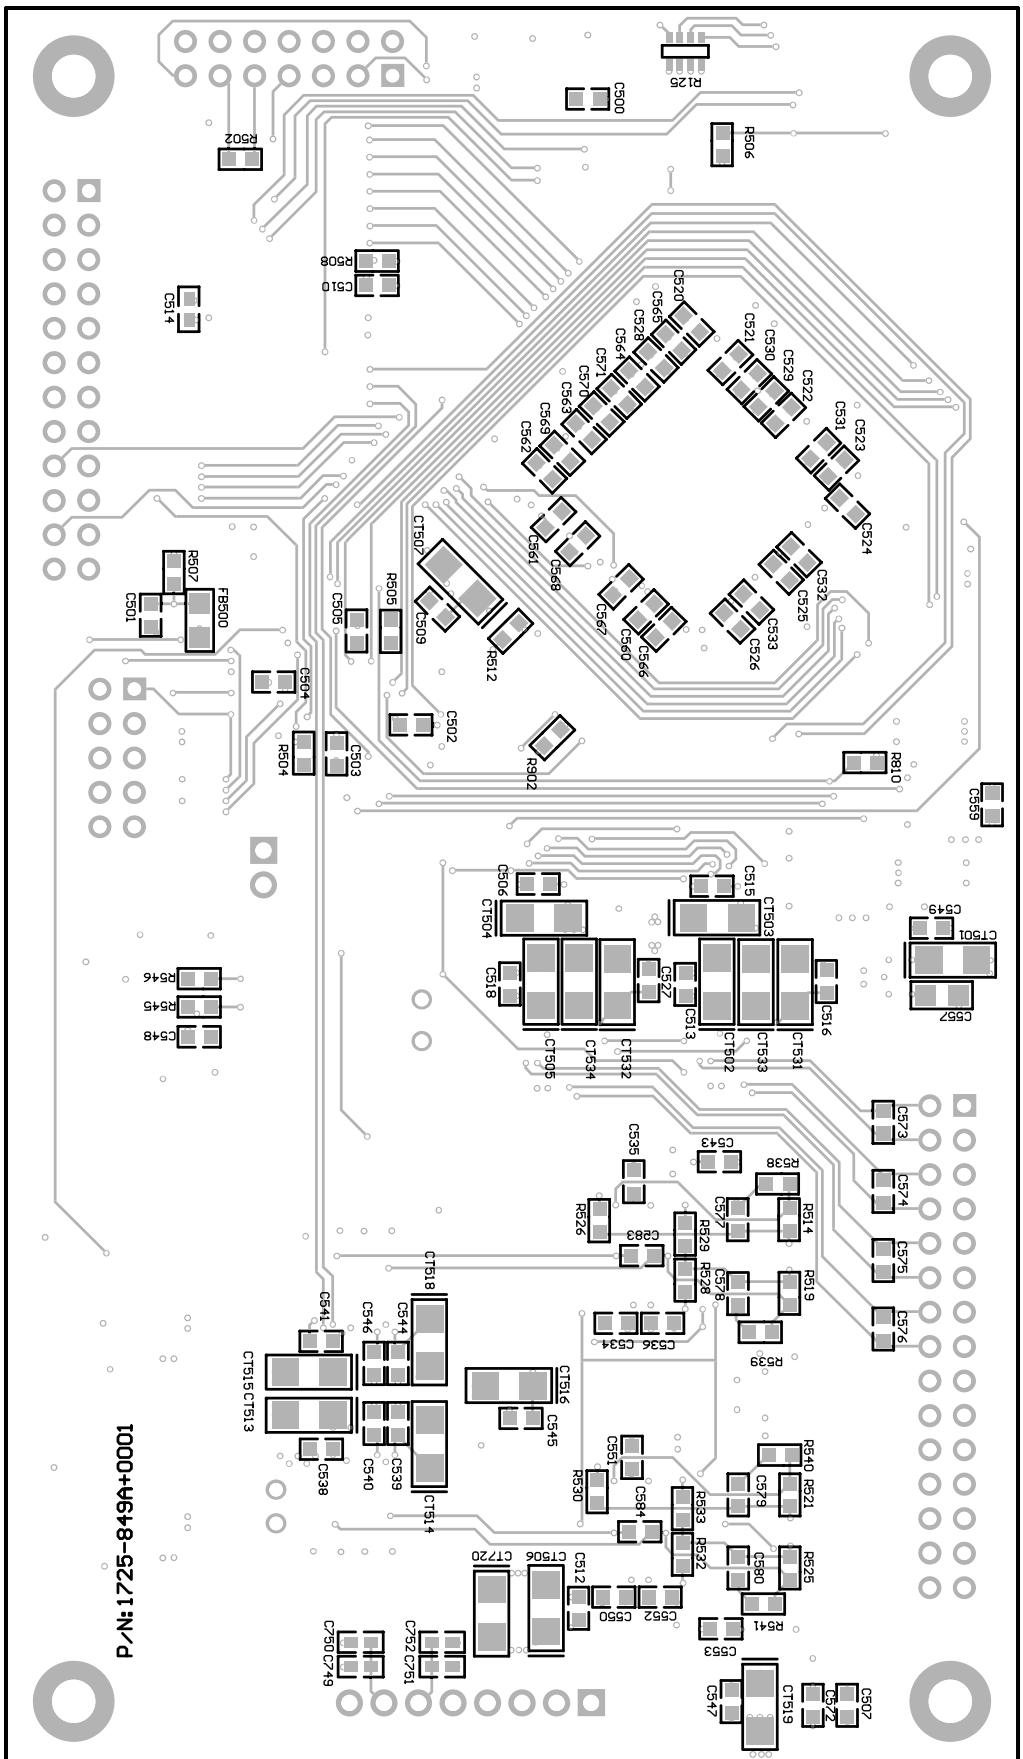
DSP PCB Bottom Etch Layer and Component Layout
